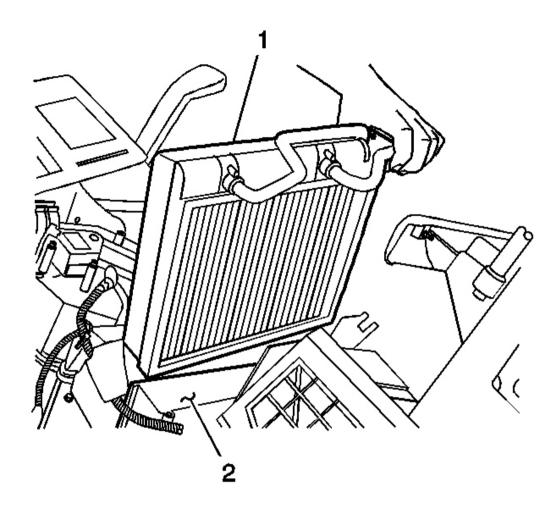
Evaporator Core & HVAC Module Courtesy of GENERAL MOTORS CORP.
